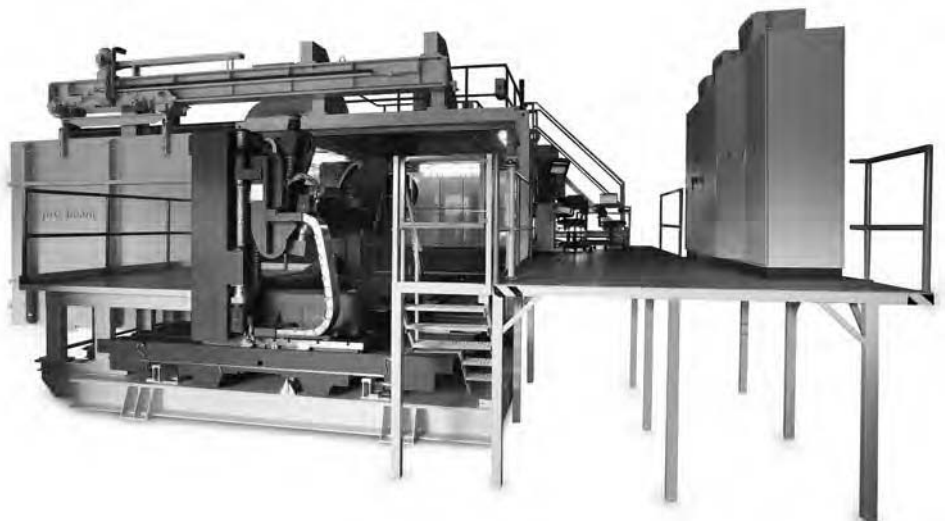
Large-chamber, high-voltage electron beam welding system. Courtesy of pro-beam AG & Co. KGaA
